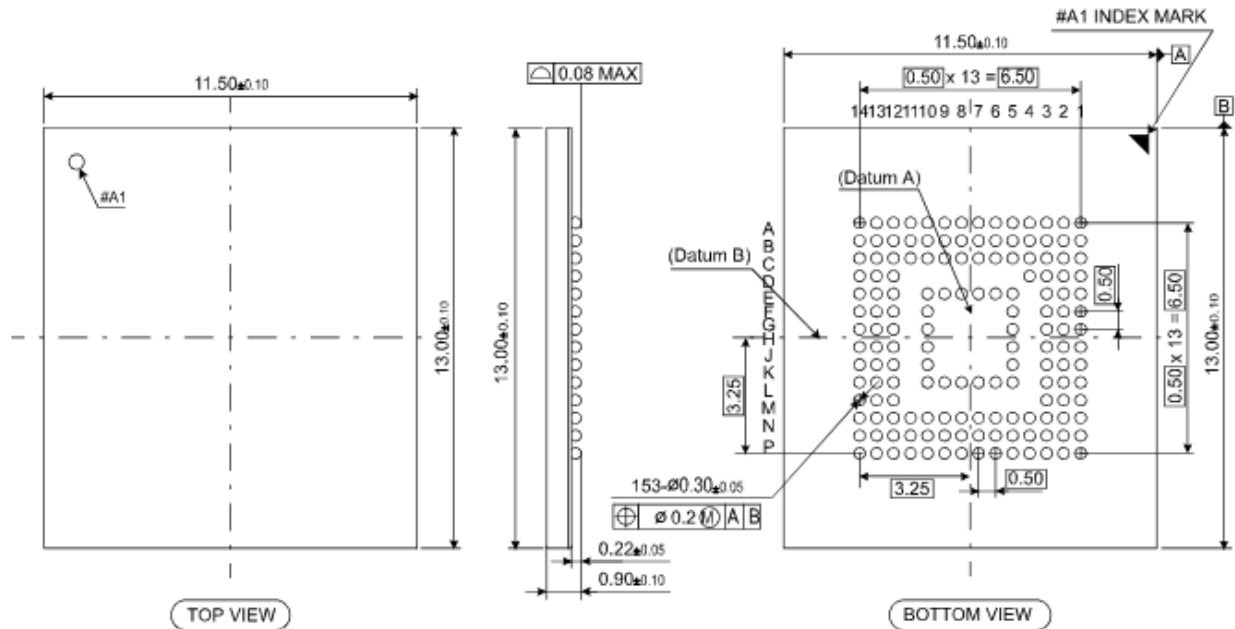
11.5mmx13mmx0.9mm Package Dimension
